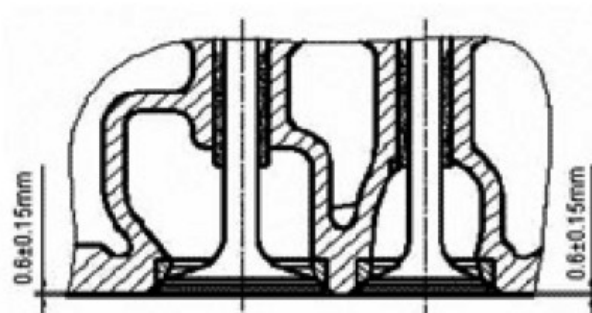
Depth of valve surface below the surface of the cylinder head
